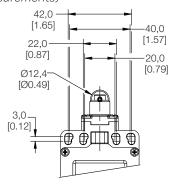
GXE Series Roller Lever Dimensions mm [in]
